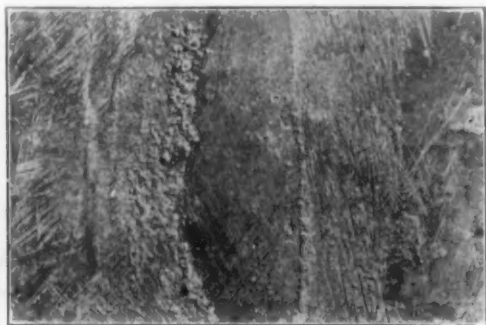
STERLING SOLDER JOINT. PHOTOGRAPHED WET, SHOWING $Al_2(OH)_3$ DEPOSIT. 1².
